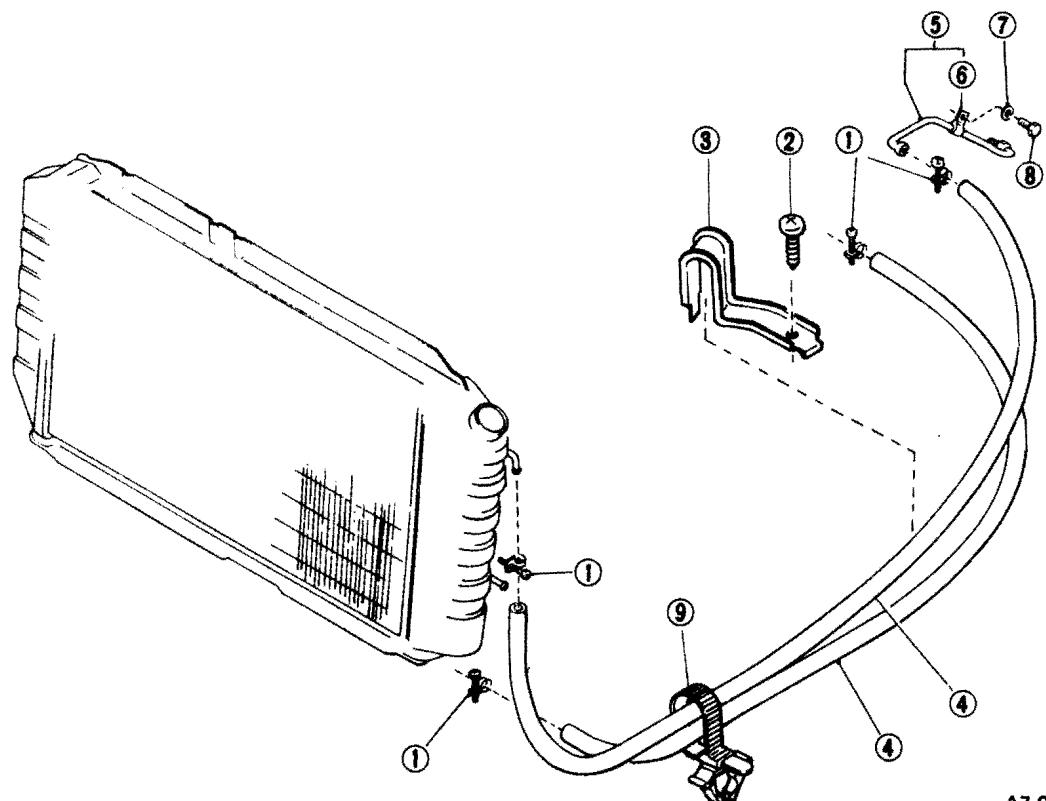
Engine cooling system [Oil cooler (AT)]
